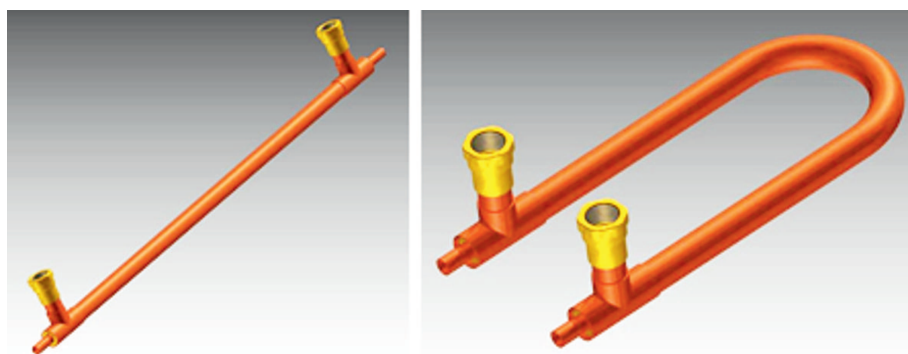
View of the designed double pipe straight and U-bend heat exchangers.
